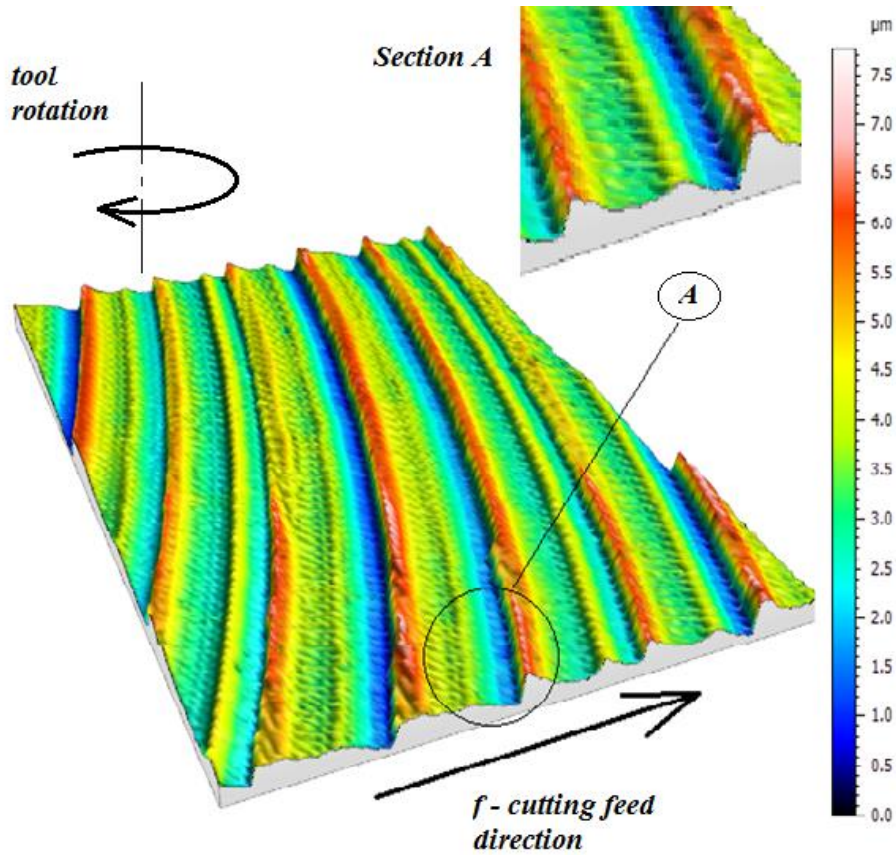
Surface topography measurements. Sample #3. Section A – area near to the highest uncut chip thickness.
